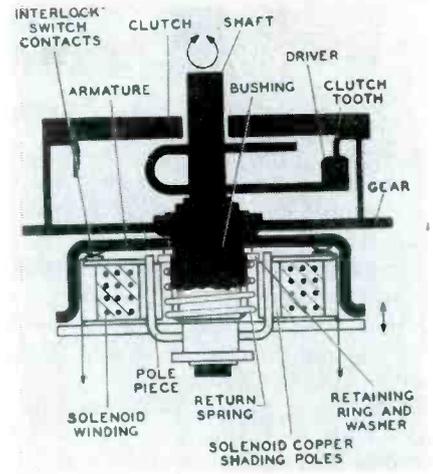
Exploded view of the solenoid and clutch assembly. Four are used in the unit.
